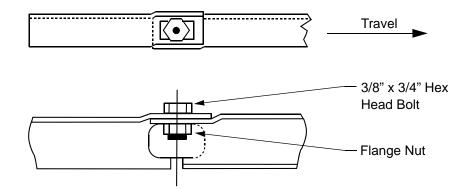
Attach Mounting Angle to Bottom Flanges
